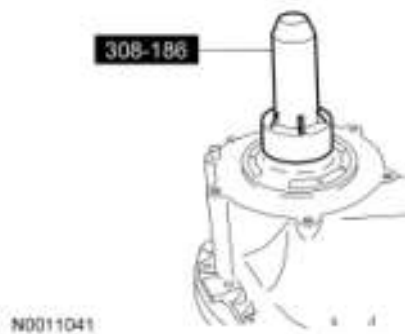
Installing Oil Seal Using Special Tool (308-186)
